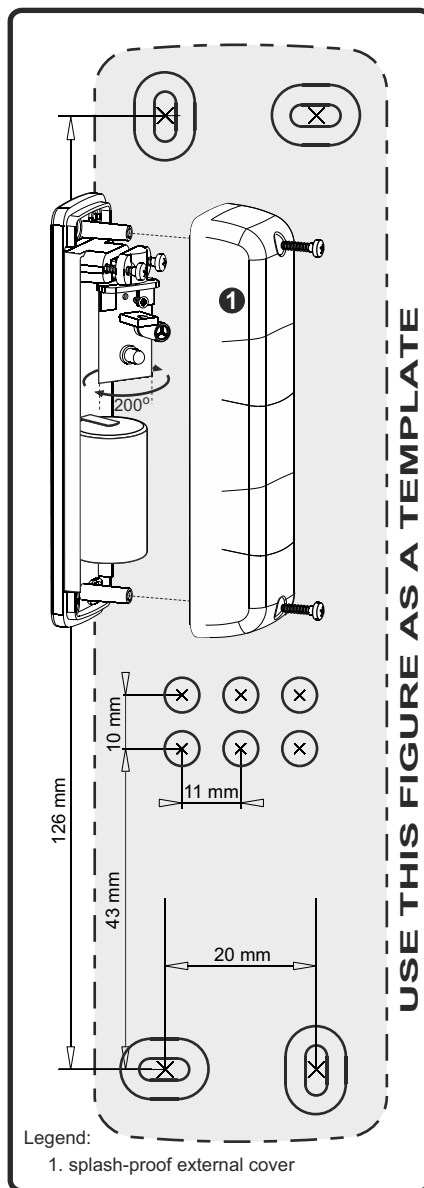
Spacing of holes in the scale of 1: 1, with the assembly drawing.
